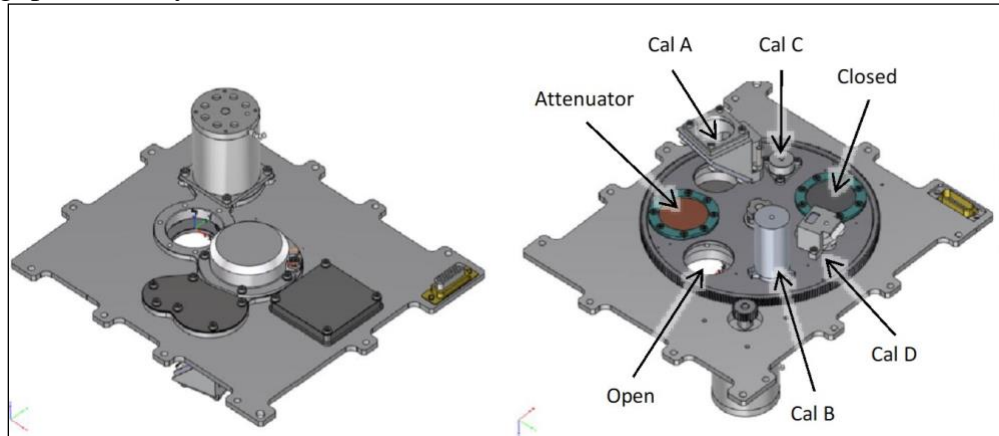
Filter and calibration wheel assembly (left: top view (+z); right: bottom view (-z))
